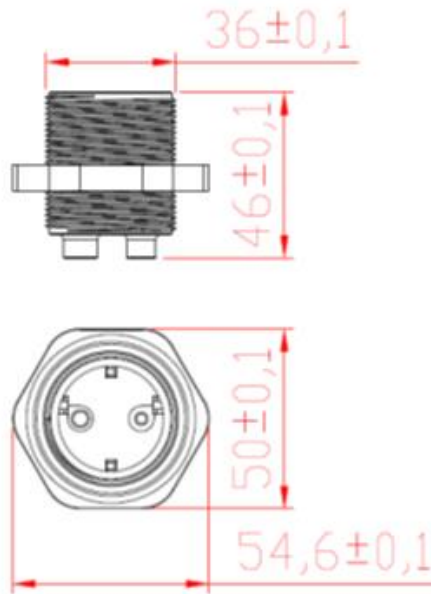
Dimension of RSE-A screw and nut (Unit:mm)
